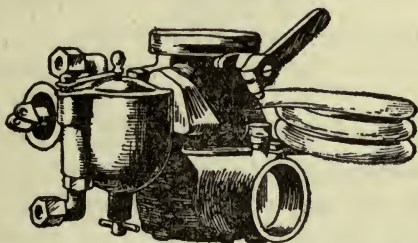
C.—THE CONSTRUCTION OF A CARBURETOR
